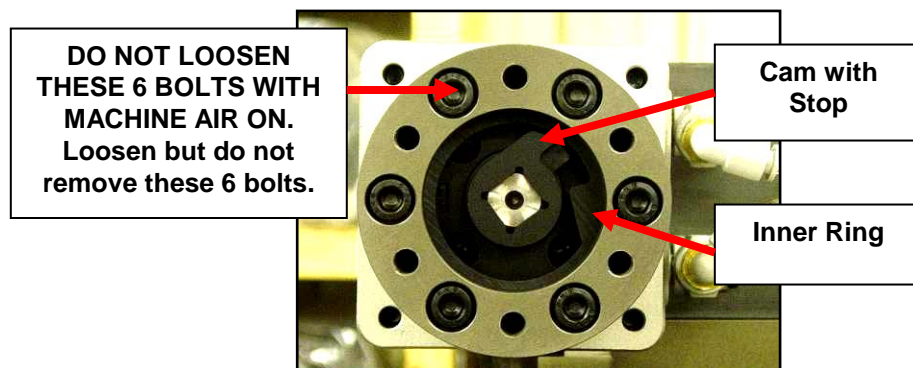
BEND LEAF ACTUATOR CYLINDER
